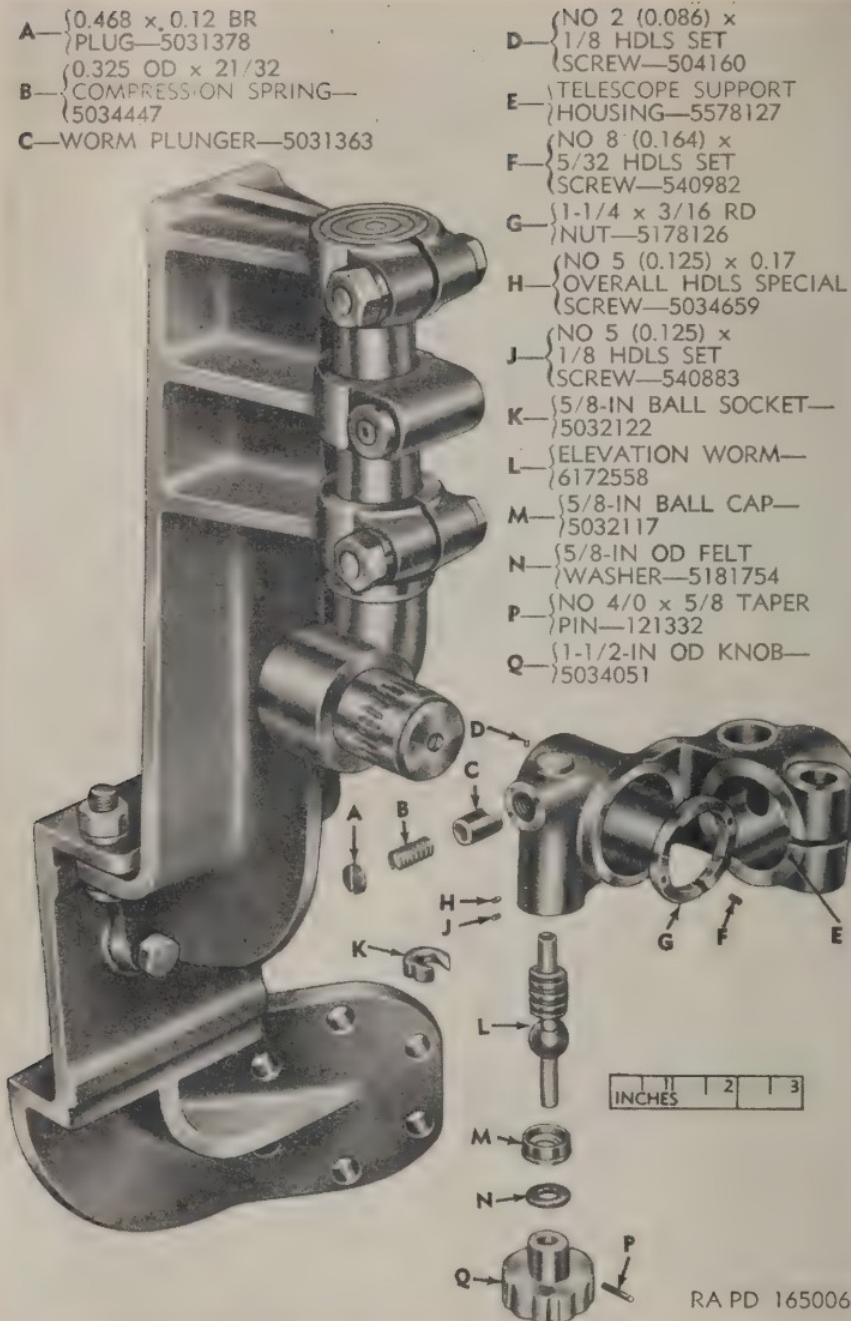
Telescope mount M28—removal of the telescope support housing—exploded view.
